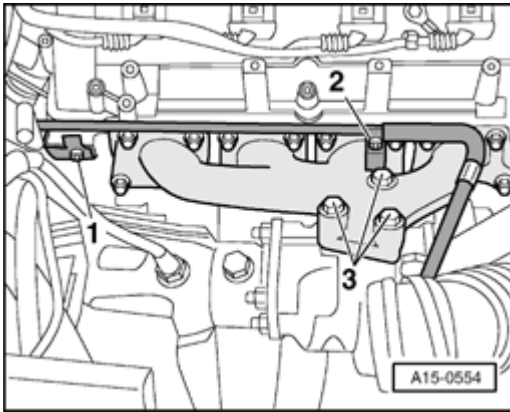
Removing Bolts Of Oil Supply Line & For Turbocharger
